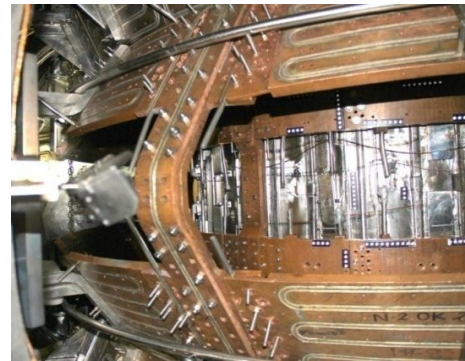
Final assembly of PFC modules in SST-1 vessel
